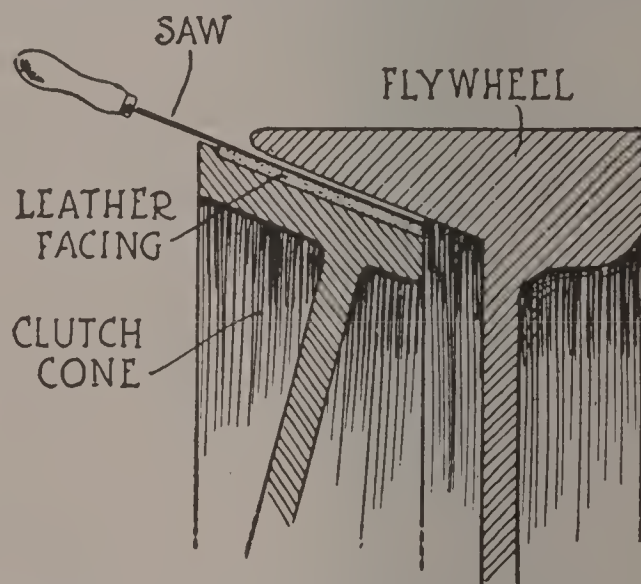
Method of Roughing-Up Clutch Leather with Saw
